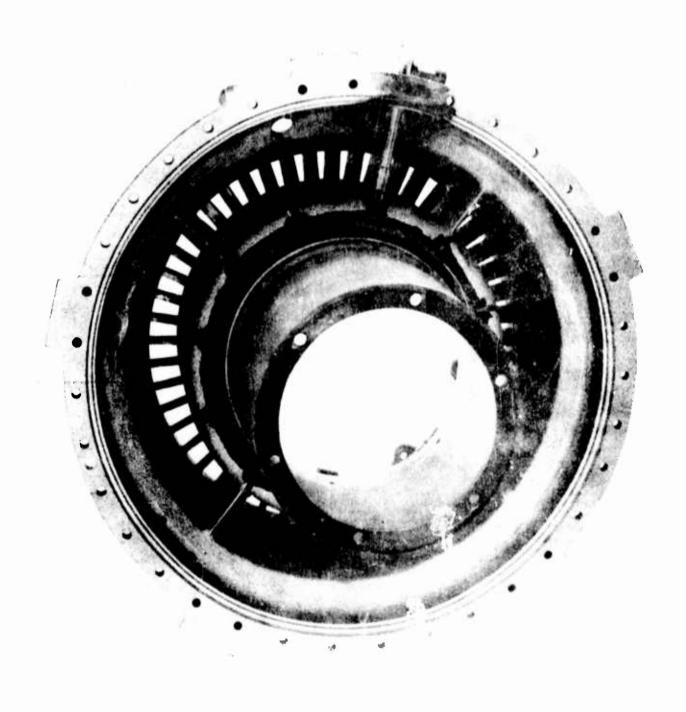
Rear End of Midframe Assembly. The Final Design is Shown in Figure 54.
